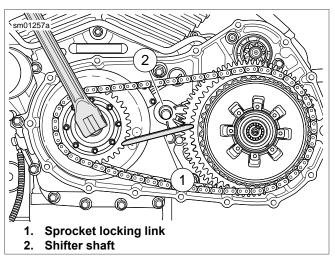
Using Sprocket Locking Link (Part No. HD-46283 or HD-38362) to Loosen Engine Sprocket Nut
